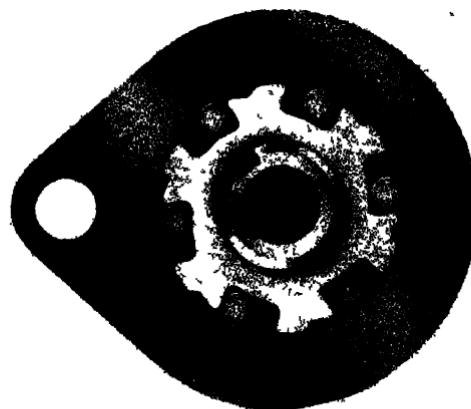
One-way, cam-type clutch (Courtesy of Zero-Max Corporation.)
